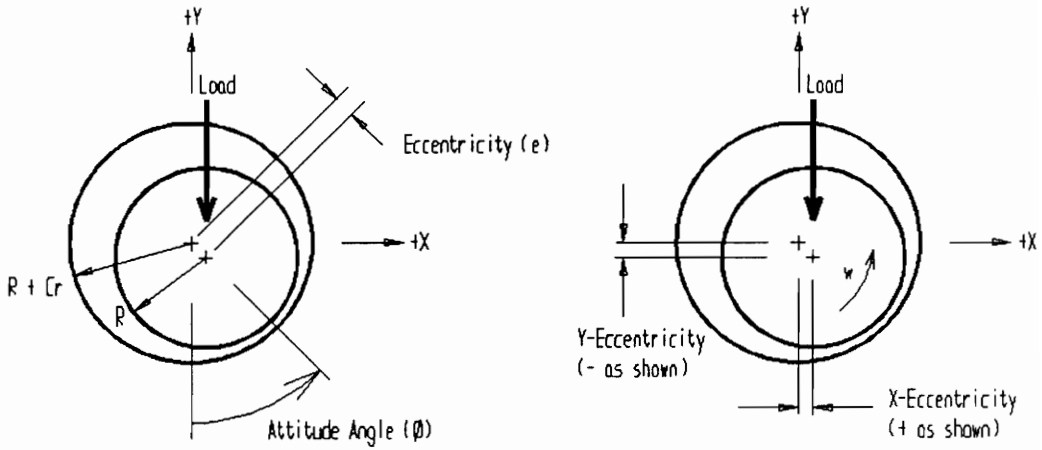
Fluid-Film Bearing Geometric Parameter Definitions
